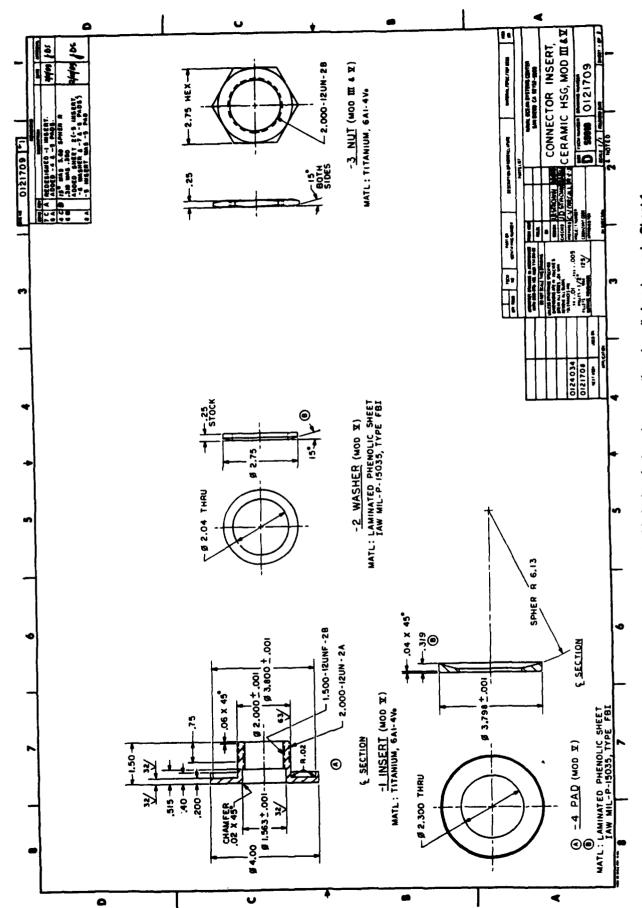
Connector insert for Mod 3 hemisphere incorporating phenolic bearing pade, Sheet 1.
